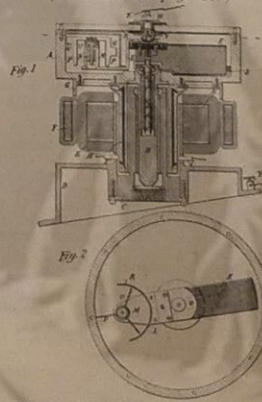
Electrical Oscillator, Illustrated in Fig. 15, Showing Details of Motor and Break Mechanism.
